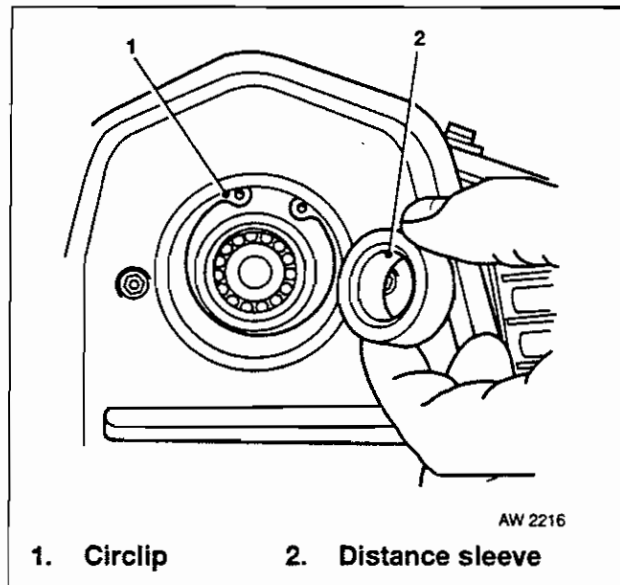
Camshaft Distance Sleeve and Circlip Removal
